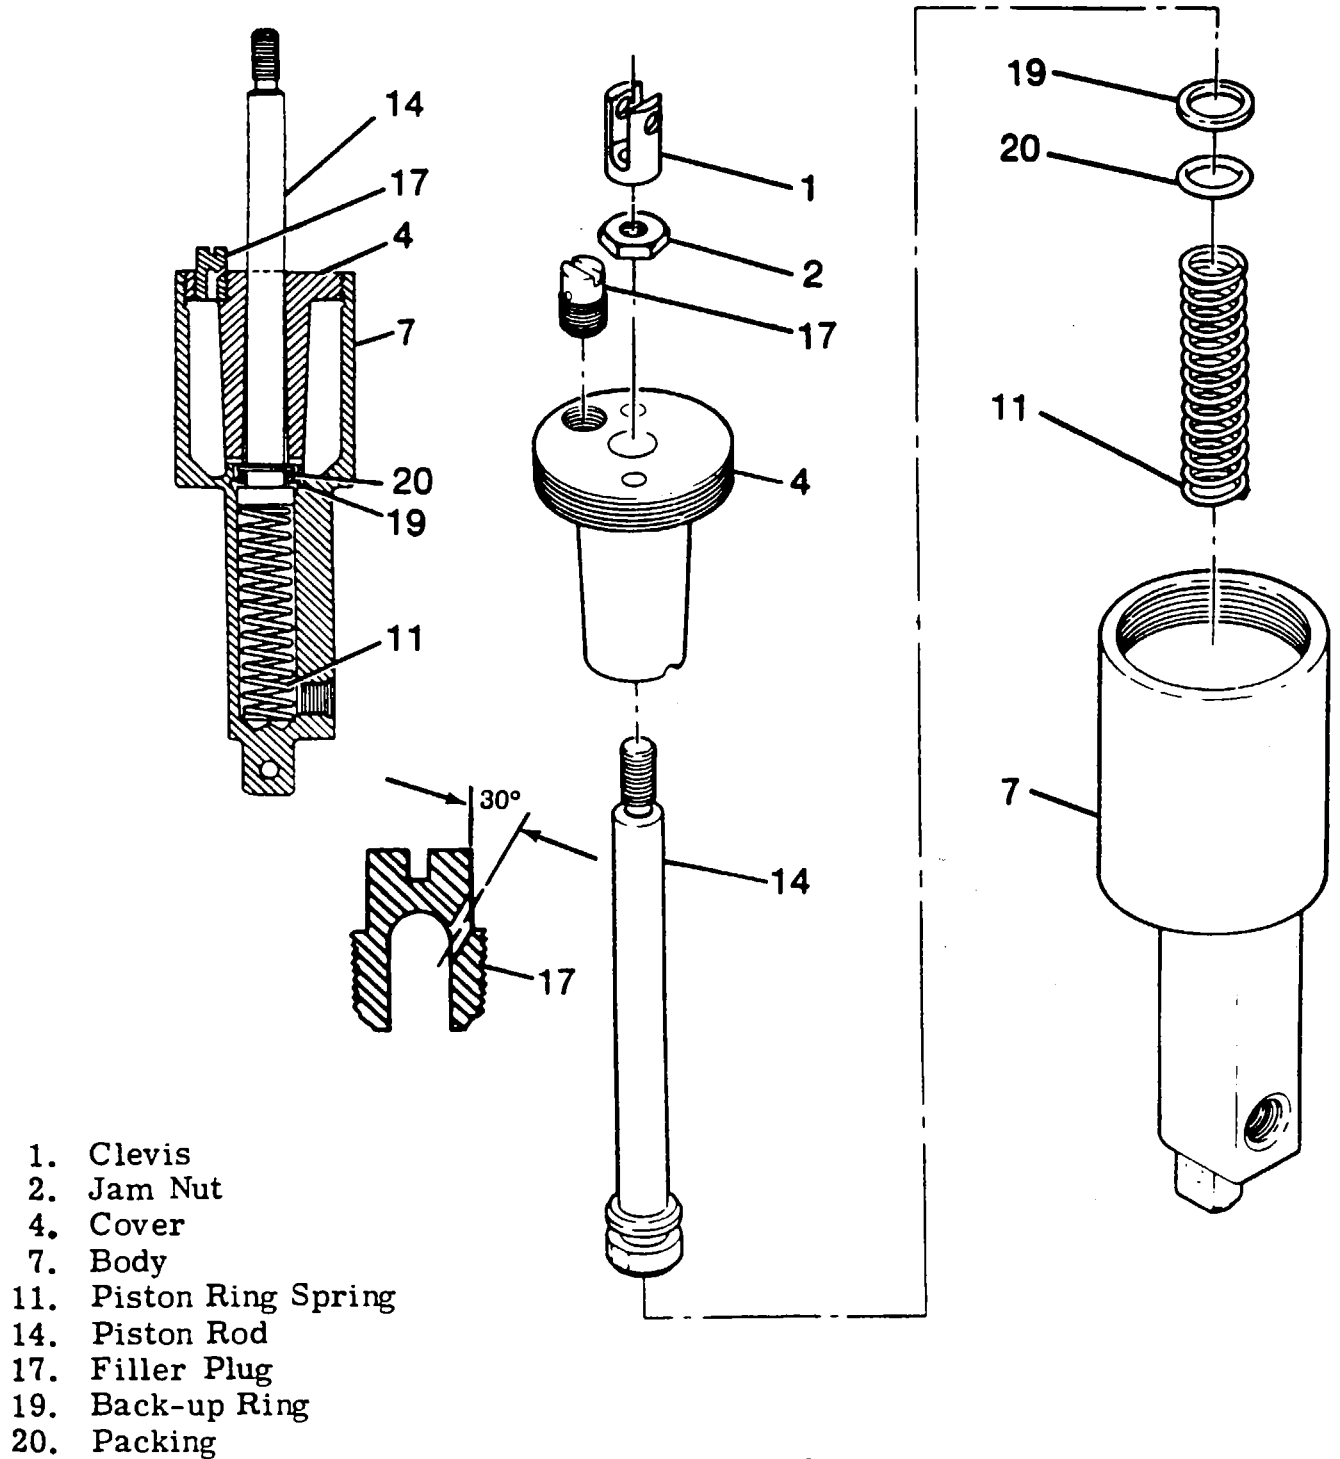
Brake Master cylinder (Sheet 2 of 2)
